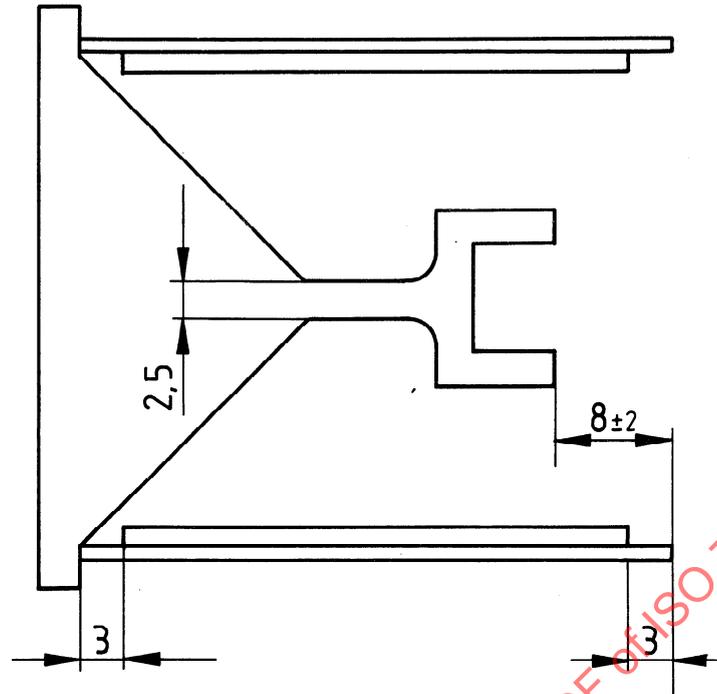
Arrangement of mesio-occluso-distal inlay pattern and liner in casting ring
